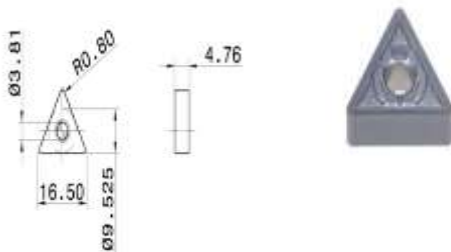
TNMG 160408-HRM AH8015 cutting tool insert
